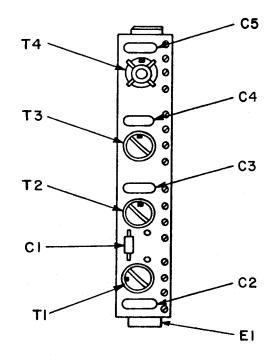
13 MHz Subassembly A2A4A3, Component Locations
